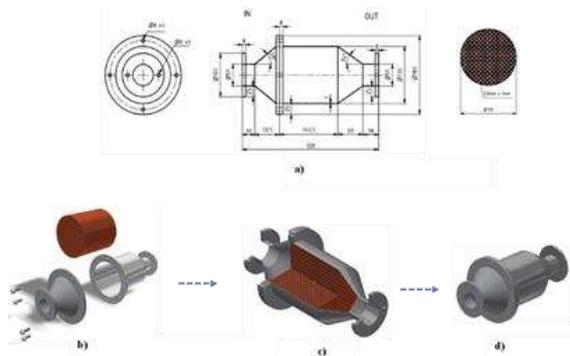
DPF design (a) DPF Casing Dimensions, (b) Casing and DPF, (c) DPF Inside the Case, (d) Complete DPF
